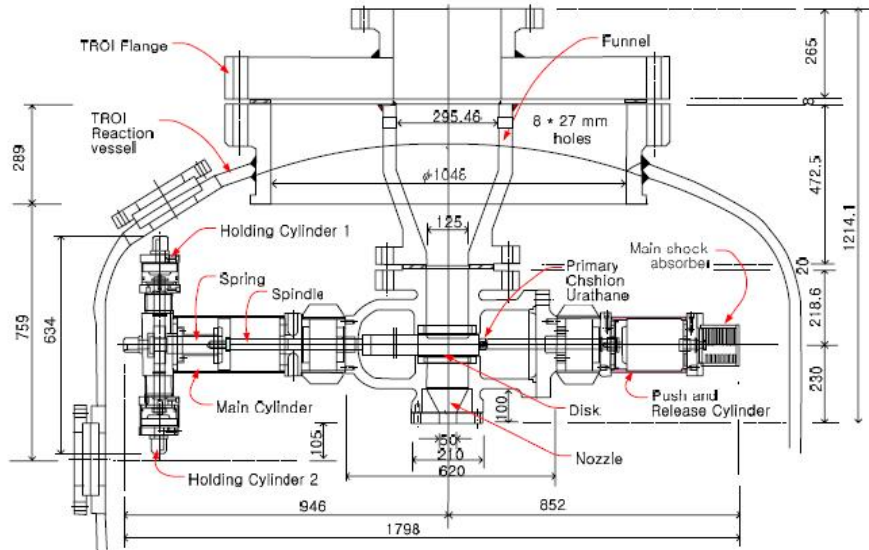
Intermediate melt catcher on the quick-opening valve assembly (unit : mm)
